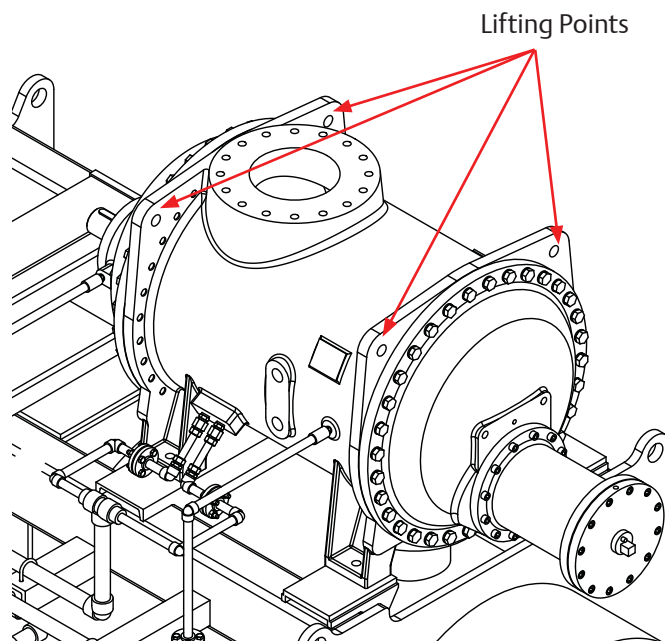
VRSG Compressor (Model 3700 Shown)
